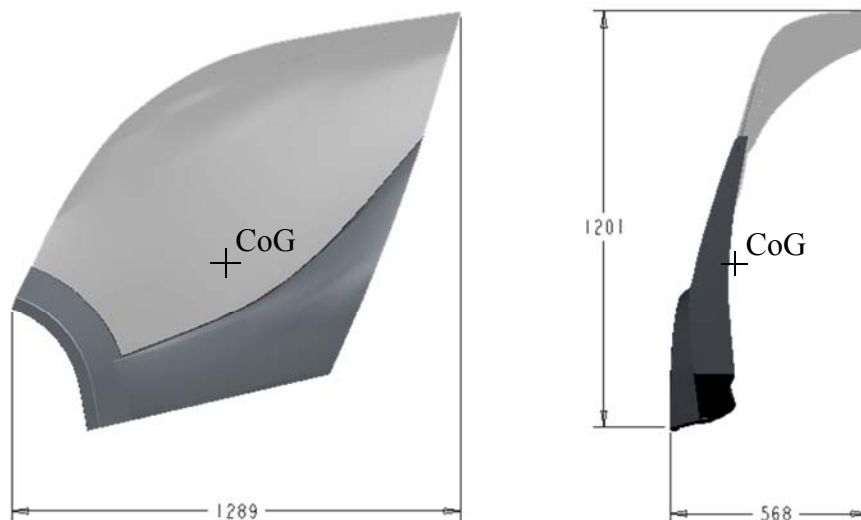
View on 3D CAD solid model with highlighted general dimensions [mm]
